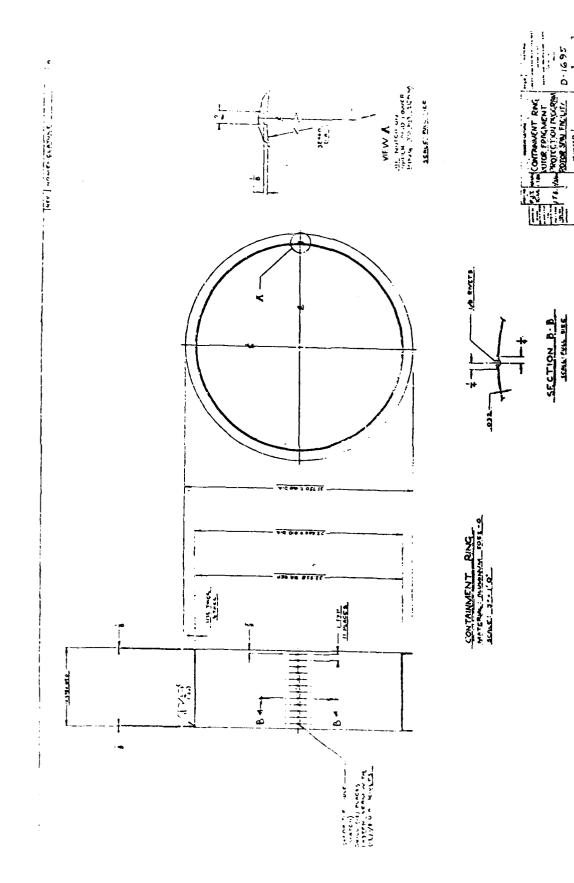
NYLON CONTAINMENT RING MANUFACTURING DRAWING (2 OF 3)
